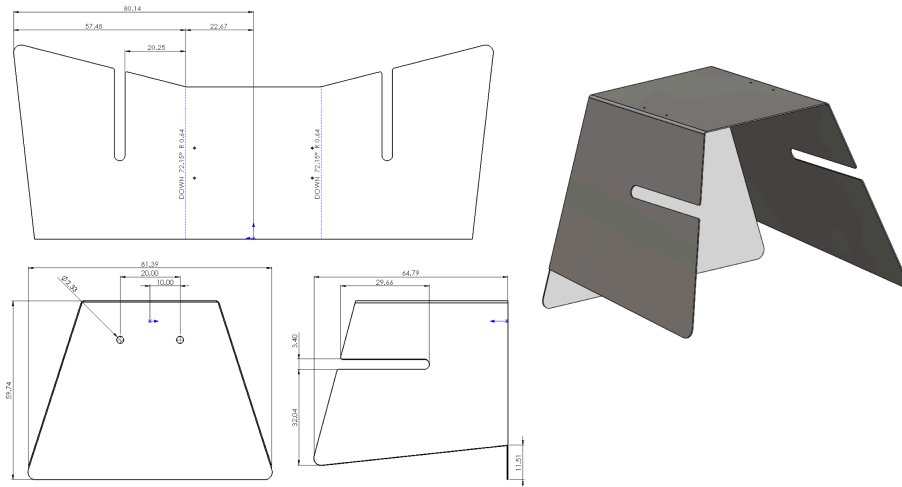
Dimensional drawing and 3D illustration of hospital bed version
